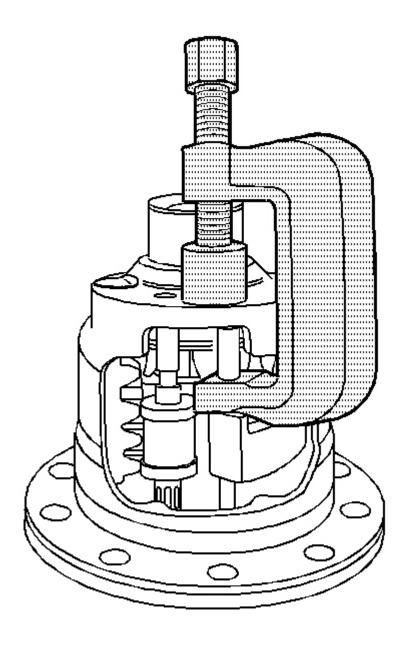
View Of Governor Bushing & J 26252 Courtesy of GENERAL MOTORS CORP.
